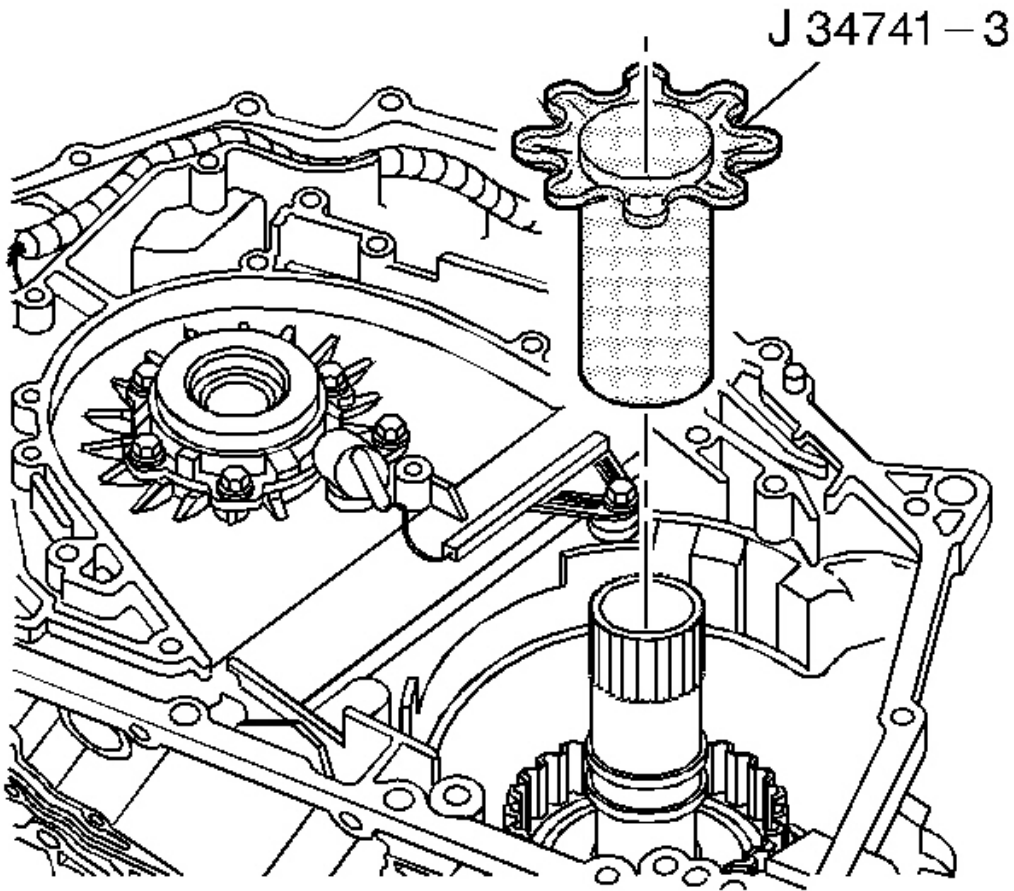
Installing J 34741-3 Over The Input Shaft Oil Seal Rings
